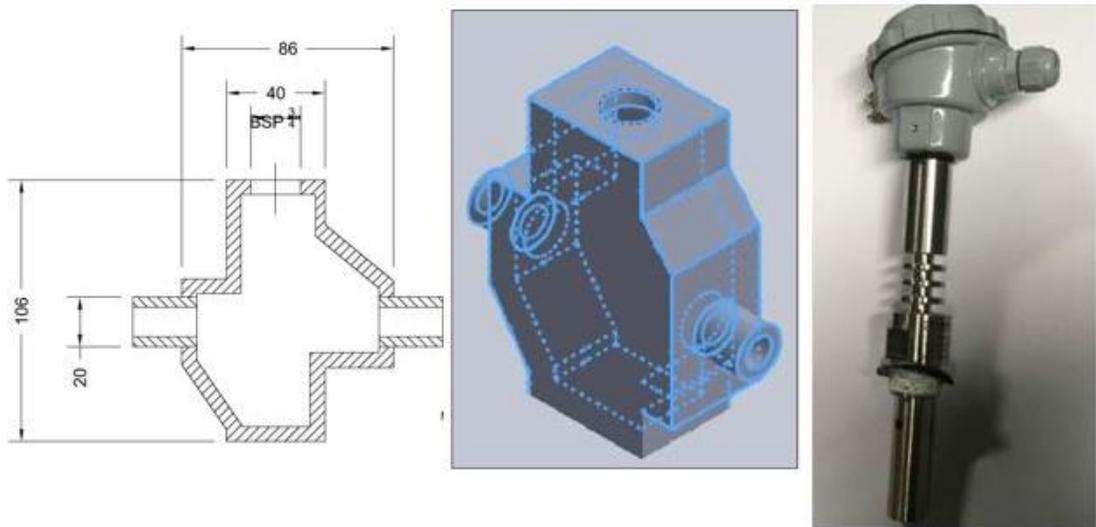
Design Sensor Chamber Structure of 2D and 3D View
